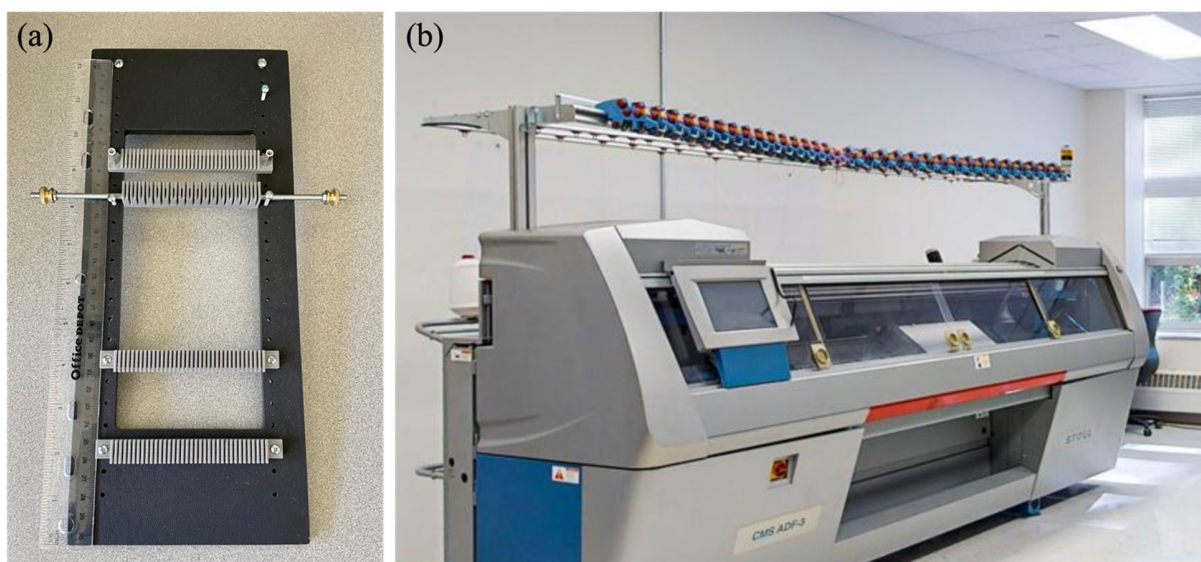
(a) in-house weaving equipment. (b) Knitting machine.
